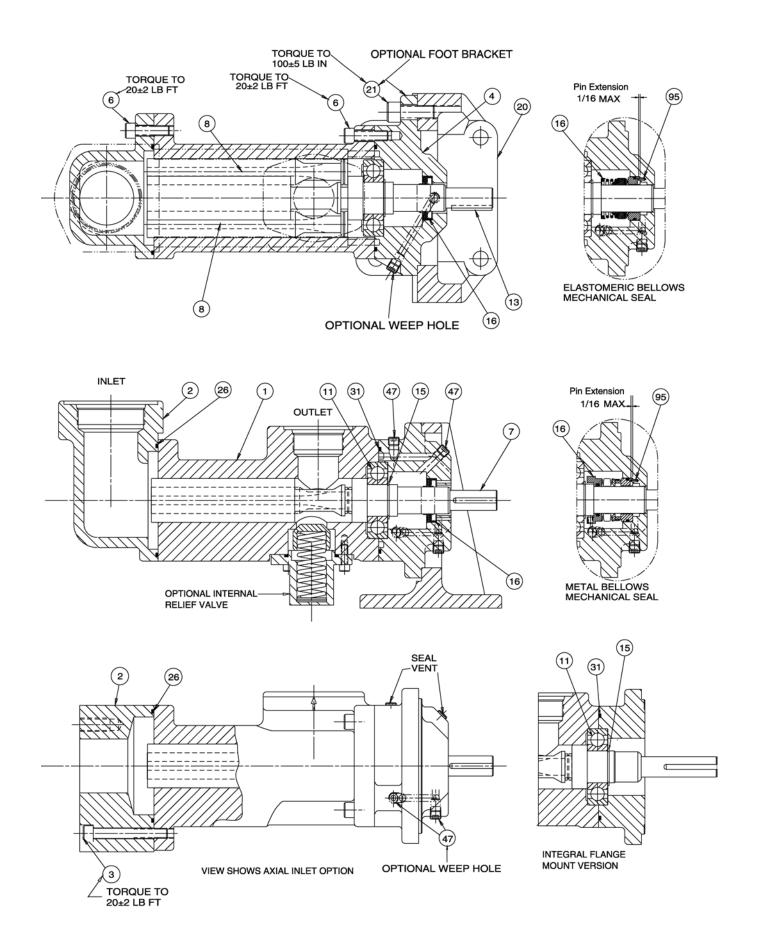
AA3G-118 to 162 Iron ump Assembly
